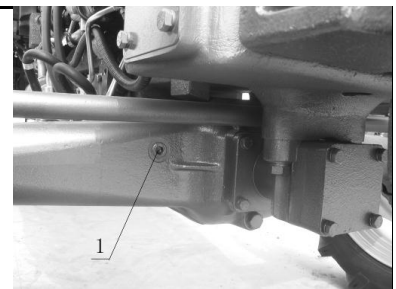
Front Axle Central Oil Chamber Adjustment and Maintenance
